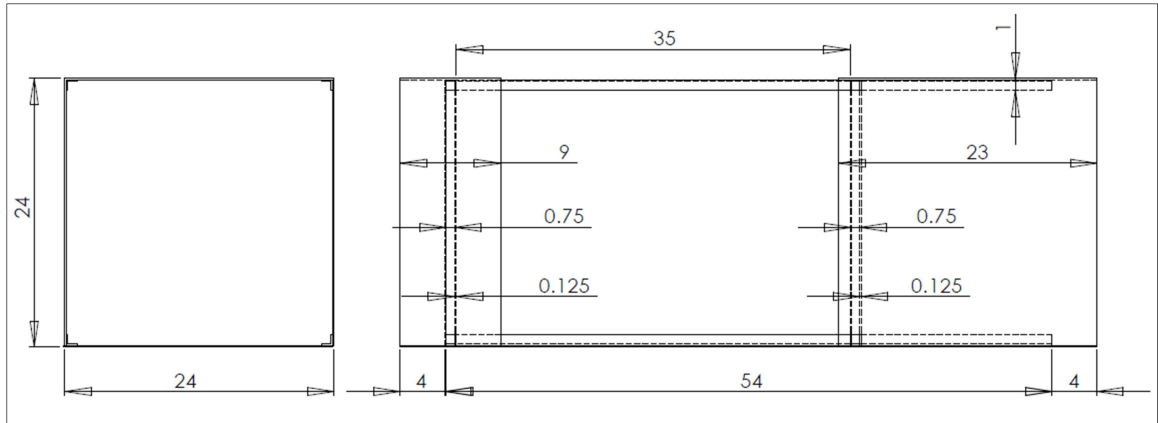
Schematic Drawing of Plug 1 (in inches)
